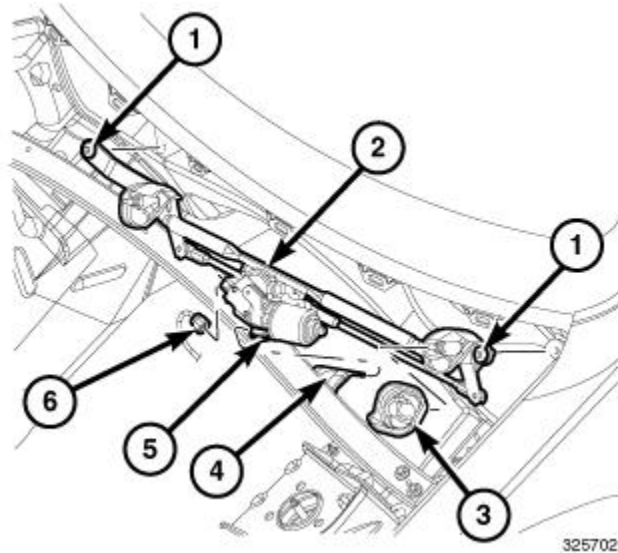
Two Screws, Wiper Module, Foam Mocket, Rubber Isolator & Wire Harness Connector
